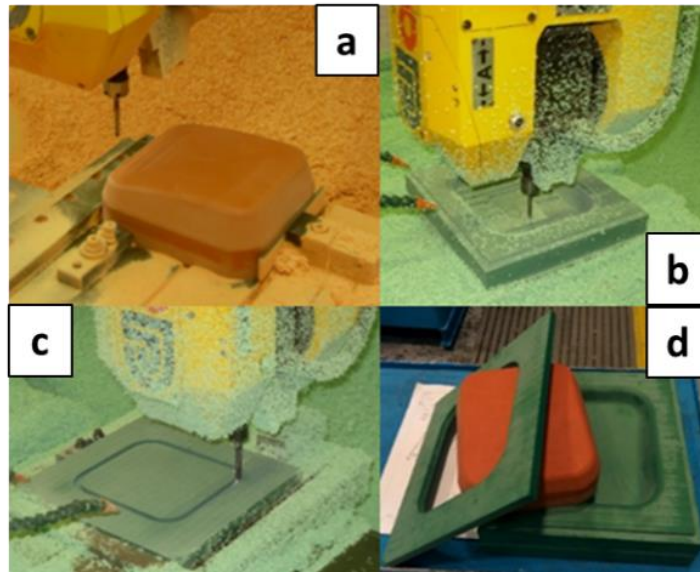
11: milling operations of punch (a), die (b), blankholder (c) and finished tools (d).
